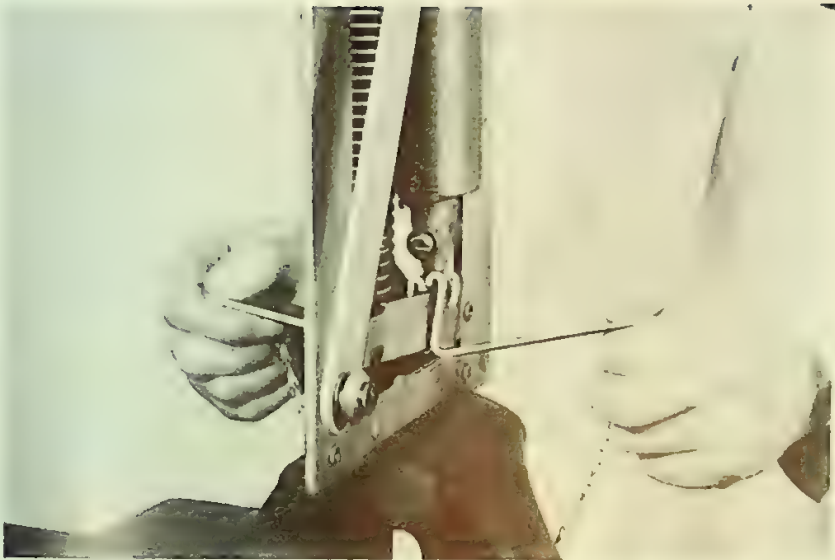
Secure Assembly in Vise and Spread Spring Clip with Special Spring Clip Remover.
